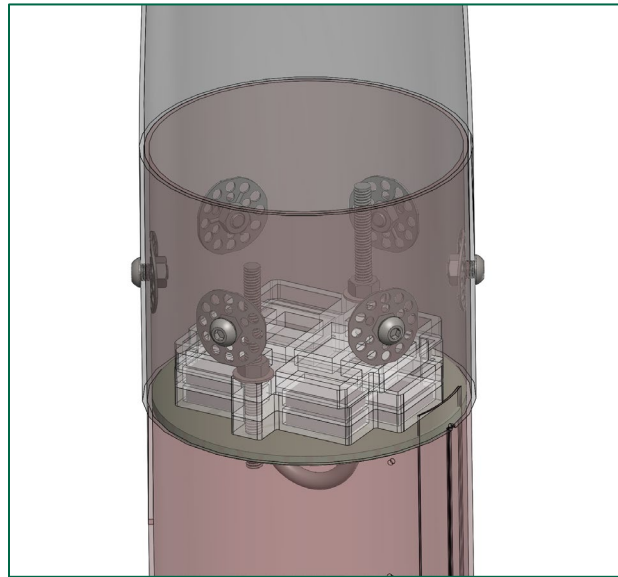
Assembled adjustable ballast system installed in nose cone assembly.
